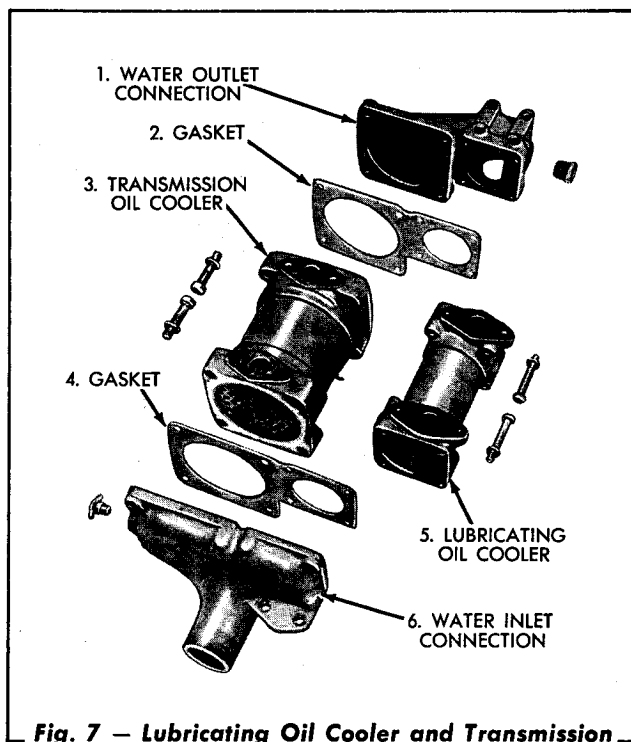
Lubricating Oil Cooler and Transmission Oil Cooler — Assembly Details
